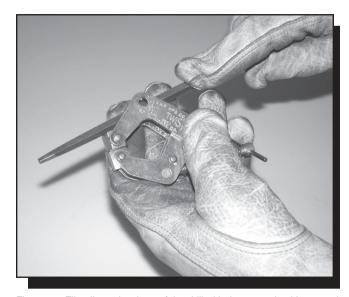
File all rough edges of the drilled holes smooth with a metal file
